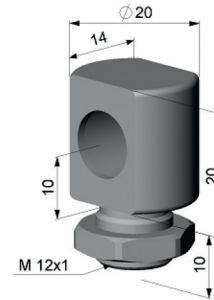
Mounting bolt with M12x1 thread, adjustable in one axis [TM-MB-CS]
